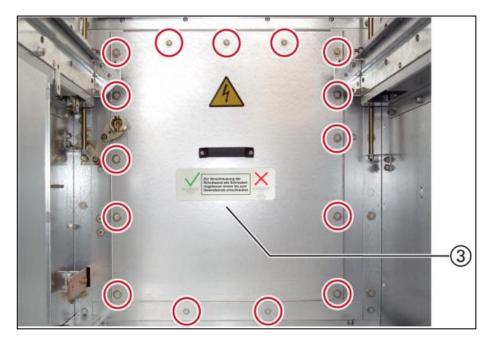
15 bolted joints on partition in circuit-breaker panel, panel spacing 800 mm
